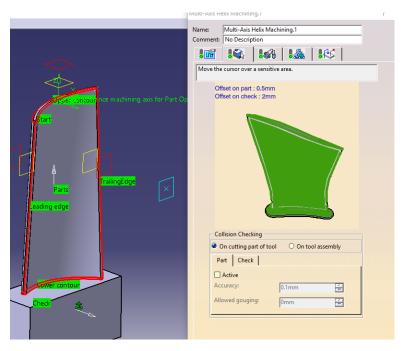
Geometry setting of CAM setting of multi axis helix machining operation
